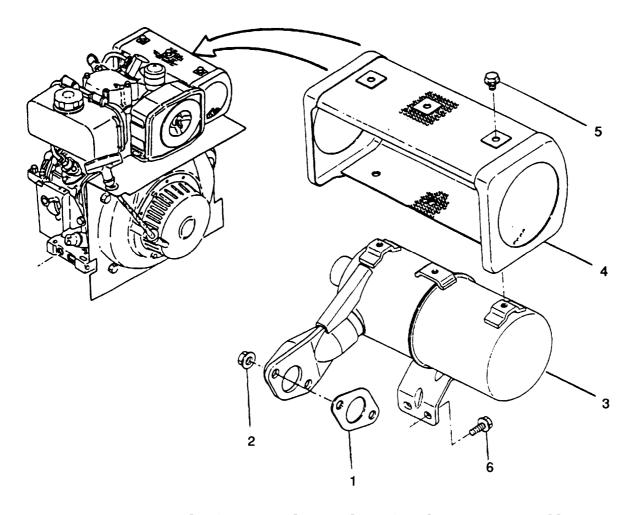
Replace/Inspect Exhaust Silencer/Spark Arrestor Assembly
